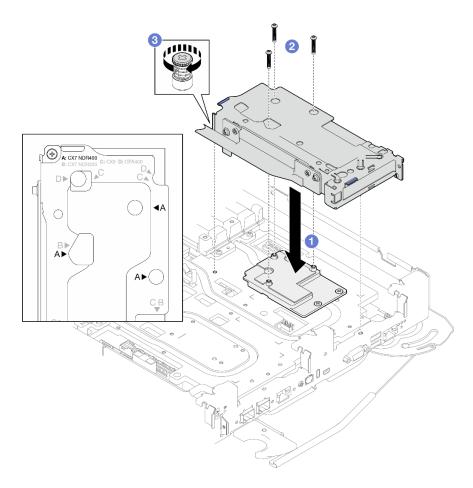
Installing ConnectX-7 NDR 400 riser assembly
